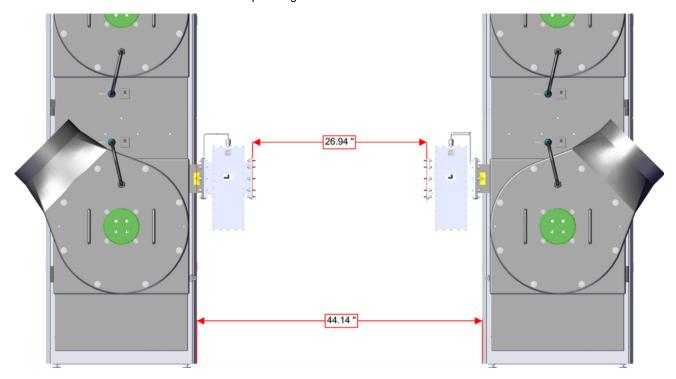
Dimensions, Space Between Cabinets and RF Output Flanges
